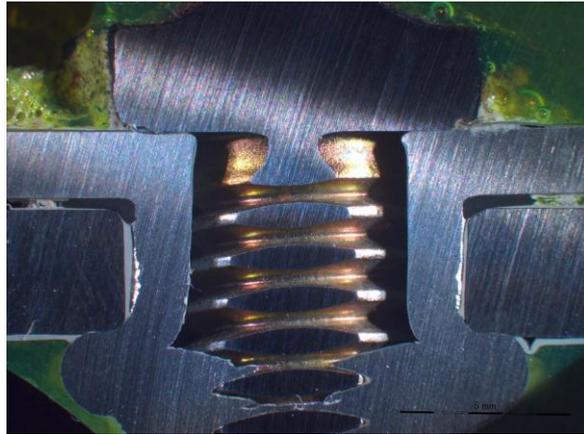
Cross-section micrograph of the magnesium inner part with assembled blind rivet nut and ball pin after 16 weeks MeKo-D testing
